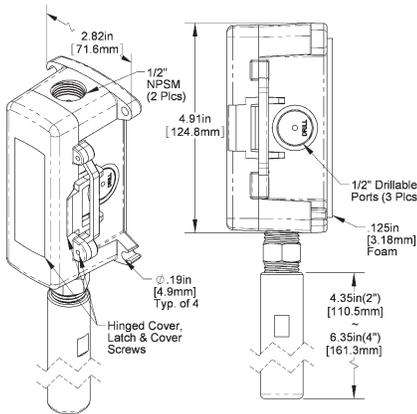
BB, 2" & 4" Buffer w/SS Threaded Fitting
